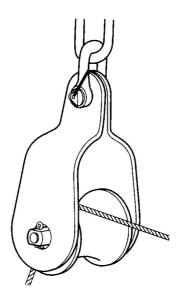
Roller Shackle with Pivotal Cheek Plates
